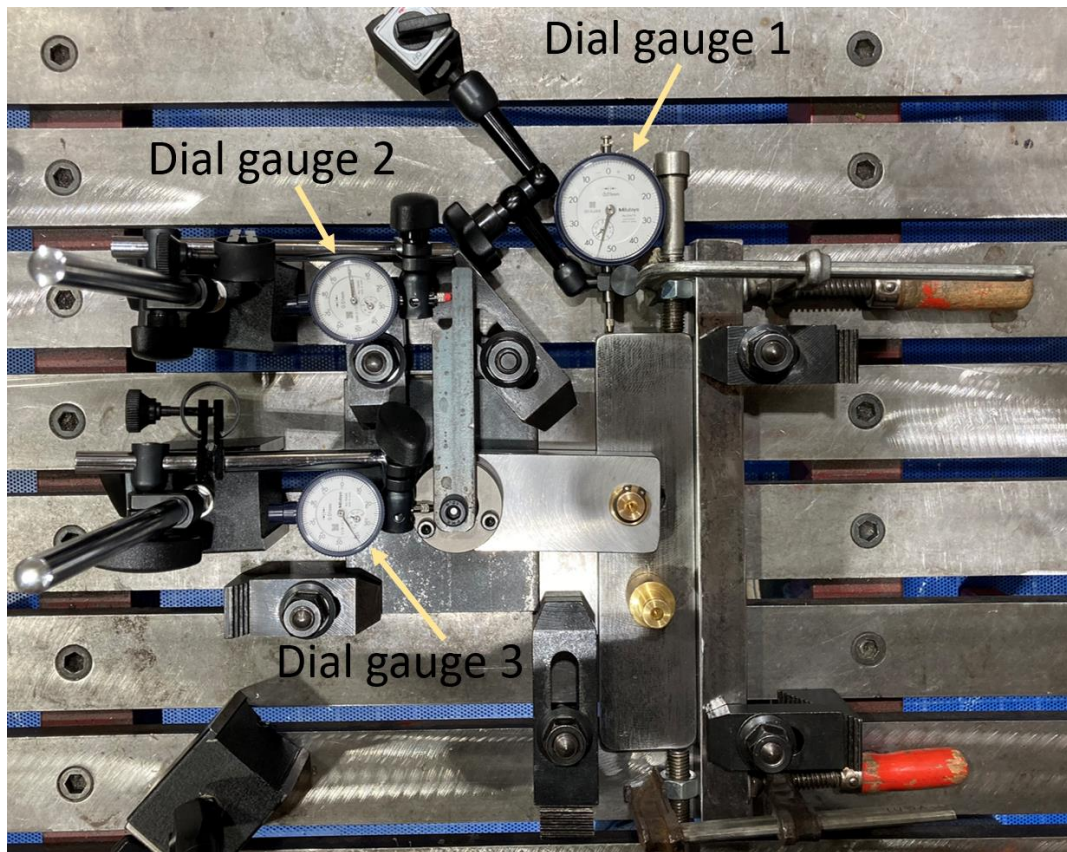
Mock-up with the old connection mounted on a welding table.
